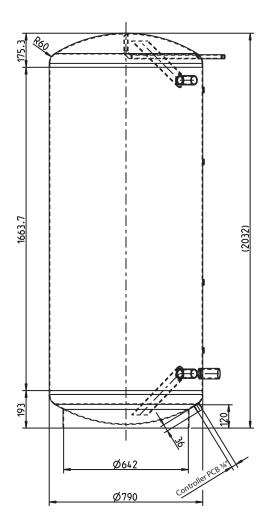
Dimensions Buffer vessel SE940 (complete)
